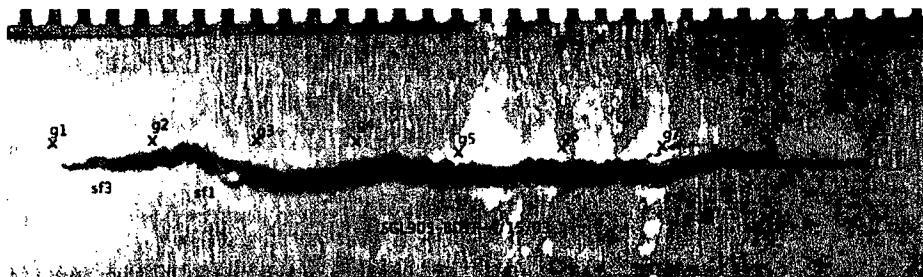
Stage 2 SCC axial flaw SGL905-BDTF-4/15/03.
